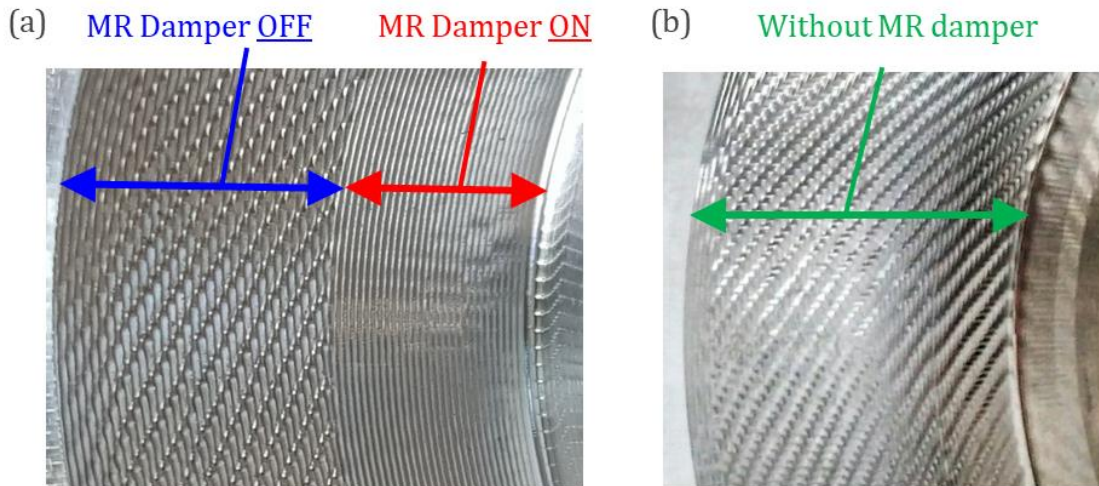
Illustrations of the bored part surfaces of Al 7075 part with and without MR damper: (a) MR damper on and off. (b) without MR damper (boring conditions: overhang length of 130 mm, spindle speed of 500 rpm, feedrate of 0.3 mm/rev, radial depth of cut of 0.3 mm).
